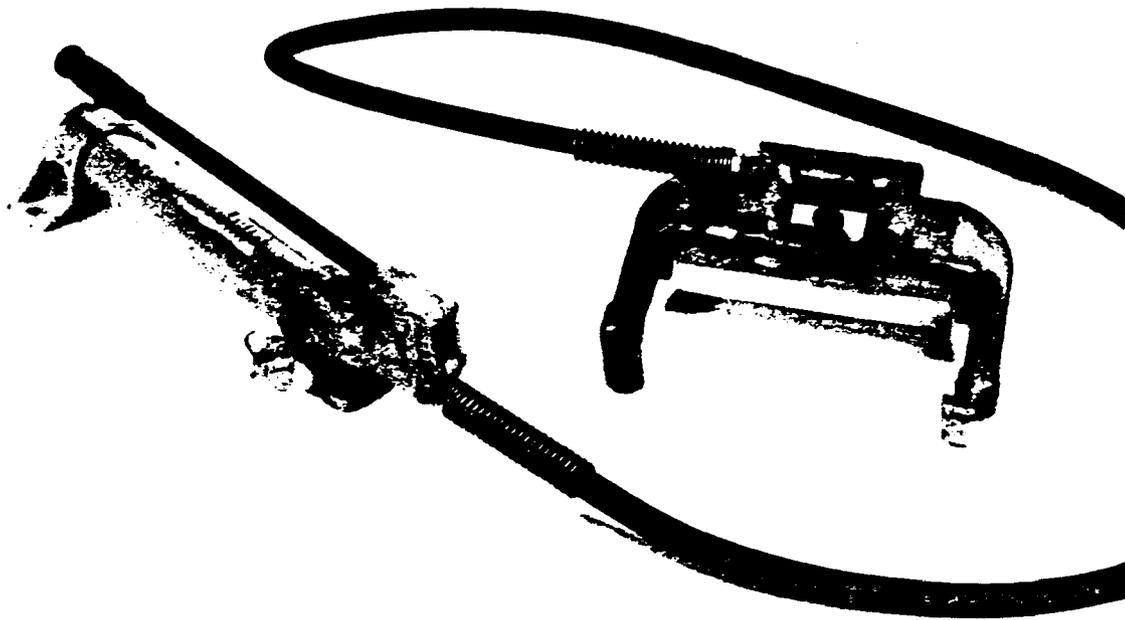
R-4373, DET. 1 HAND HYDRAULIC CRIMPING UNIT (PAR. 2.13, 3.52) RP-0556
